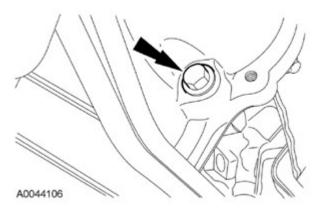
Identifying Shift Cable And Mounting Bracket Bolts Courtesy of FORD MOTOR CO.
